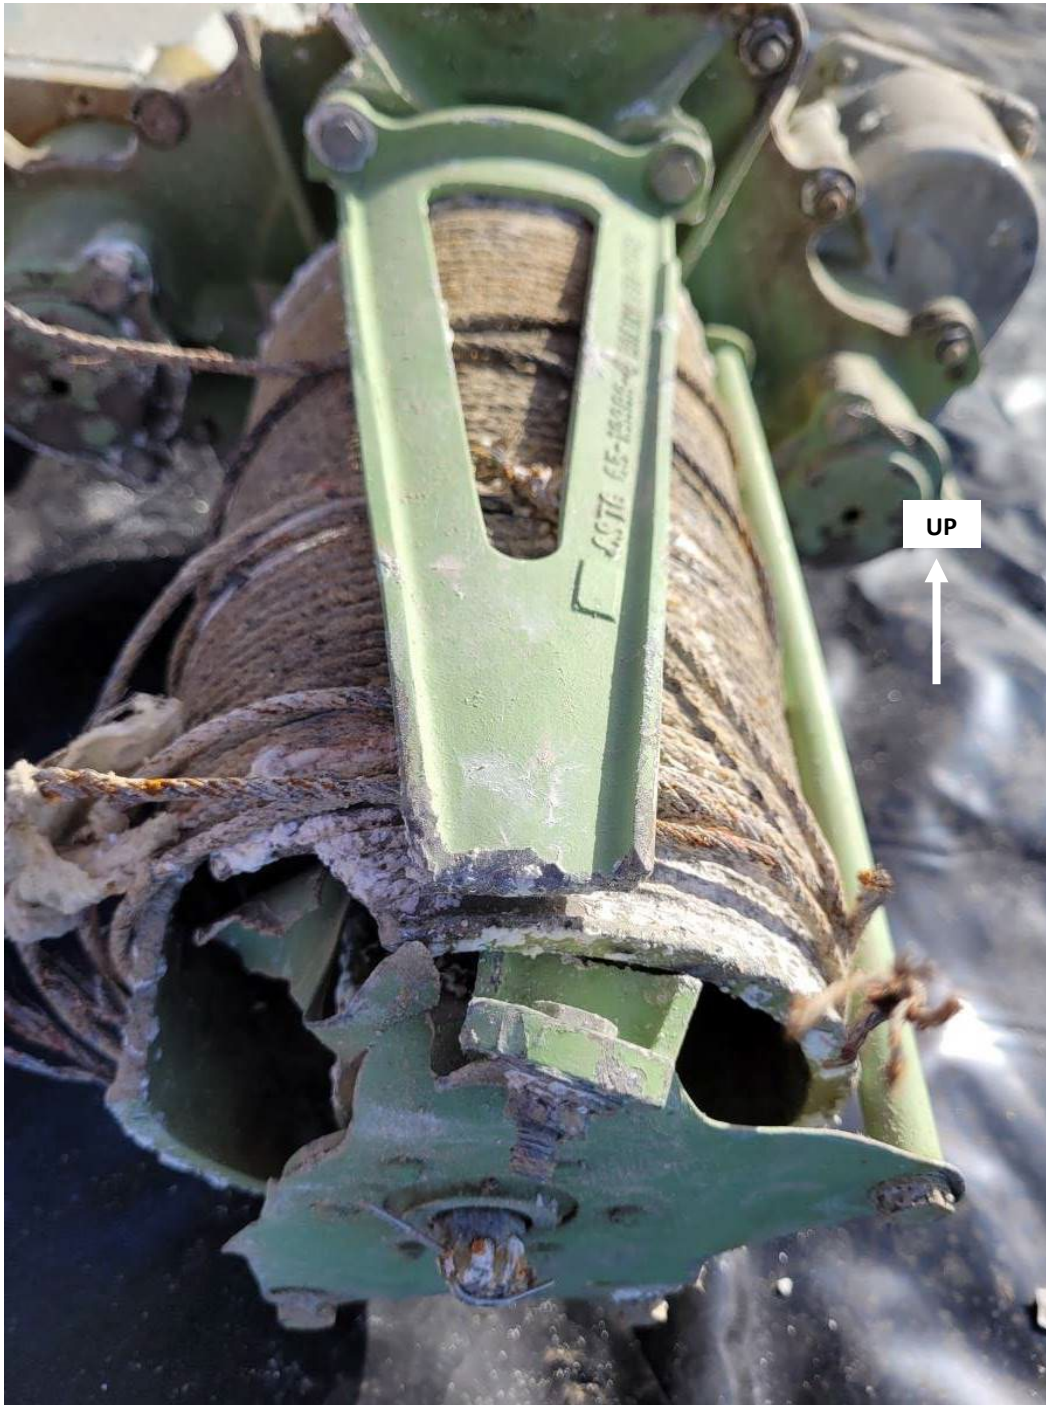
Close-up view of jackscrew cable drum damage (Boeing photo)
